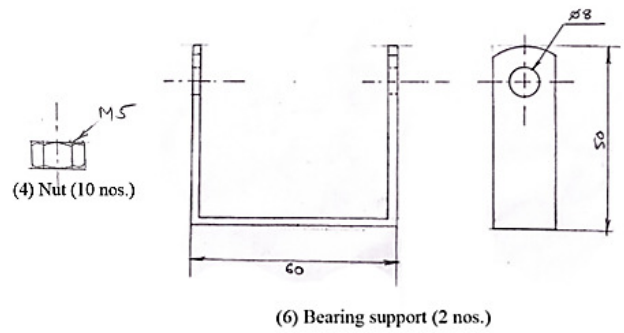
Drawing of Nut and Bearing support with their part numbers and dimension
